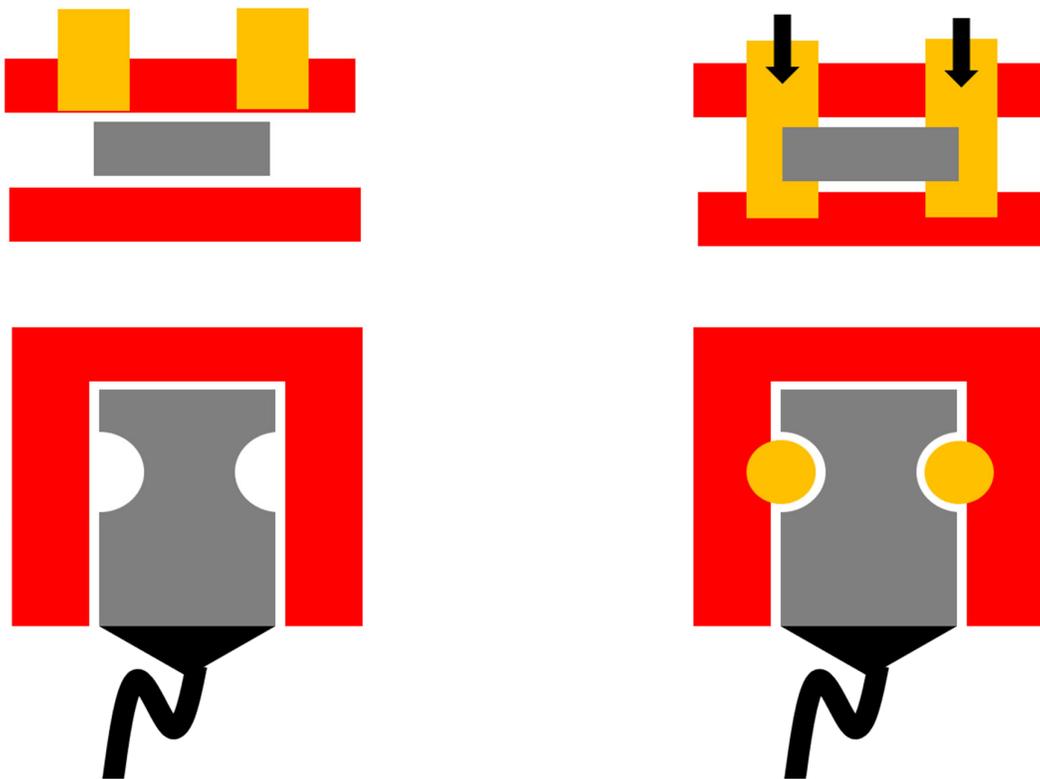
This illustrates a top mounting locking structure, where the pins come from top to bottom to secure a lockable USB cable.
